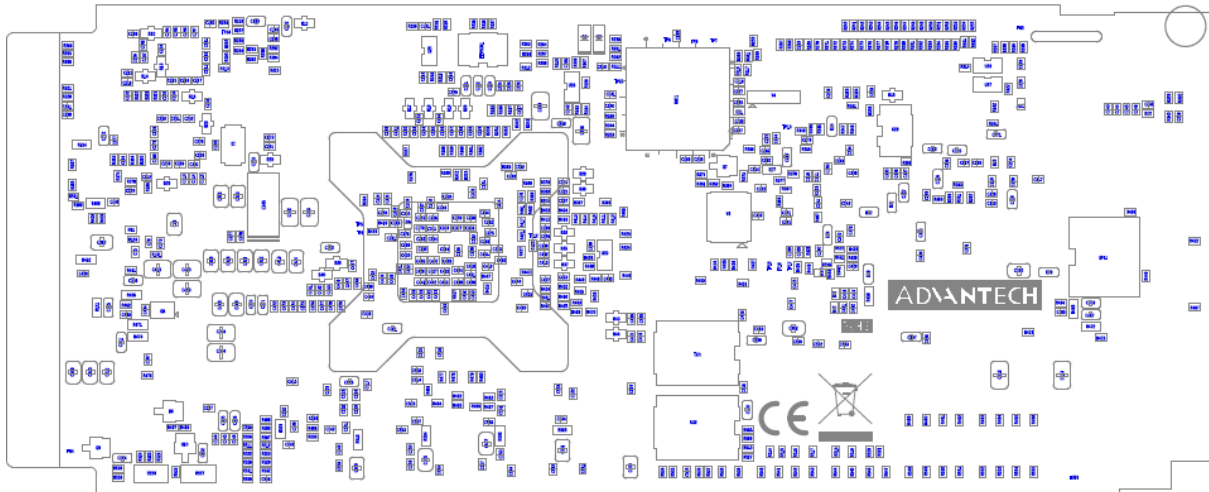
TMDXEVM6670L EVM Board layout – Bottom view
